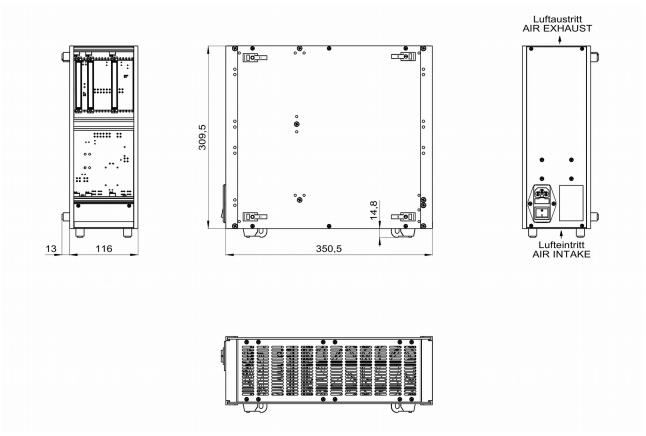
Dimensional drawing ECH 242 – 2 channel MMS crate
